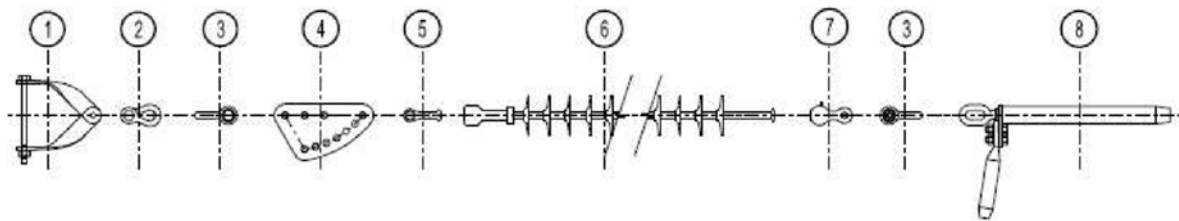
Option A - Phase Conductor Single Strain Assembly for Single “Conductor”
